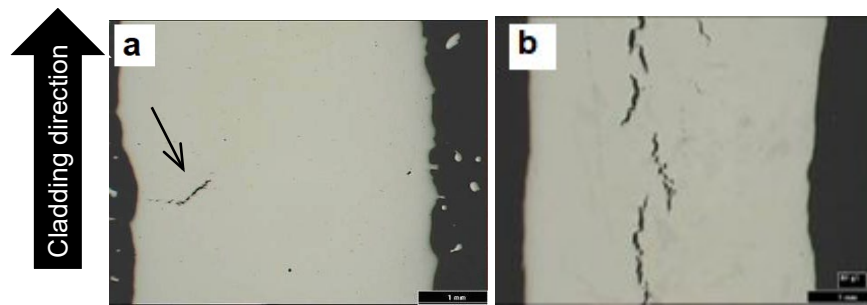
Ground and polished surfaces of the single bead laser test claddings. Magnification 7x. The width of the bead: ~4 mm. a) some small cracks (arrow), b) continuous line of cracks at the bead centreline.
